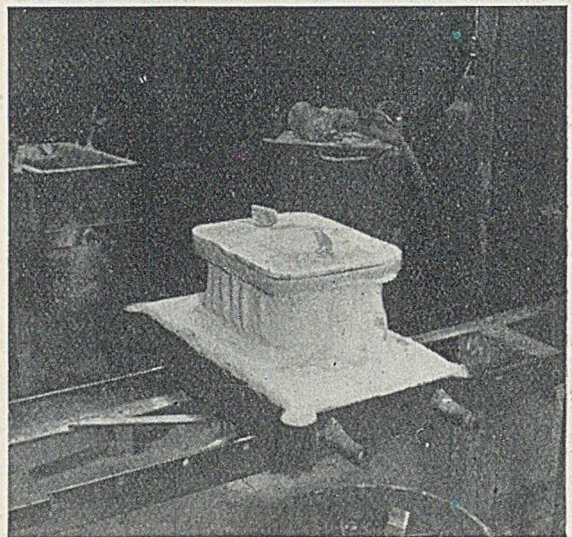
Same Mould Part as shown in Fig. 11 after its Second Investment Cycle, ready for Final Curing.
